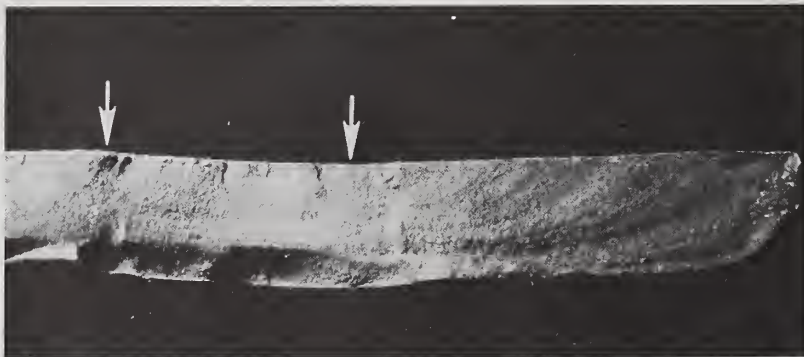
Fatigue fracture from a $\frac{1}{8}$ in thick steel component of an automobile suspension.
